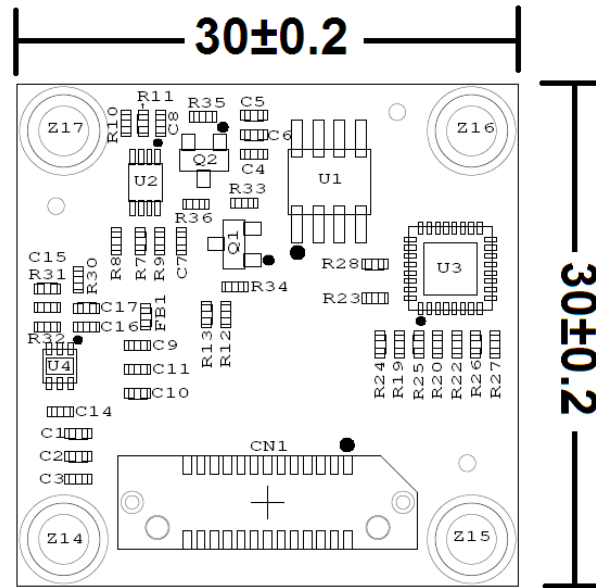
Front View of e-CAM24_CUNX Adaptor Board Mechanical Dimensions
